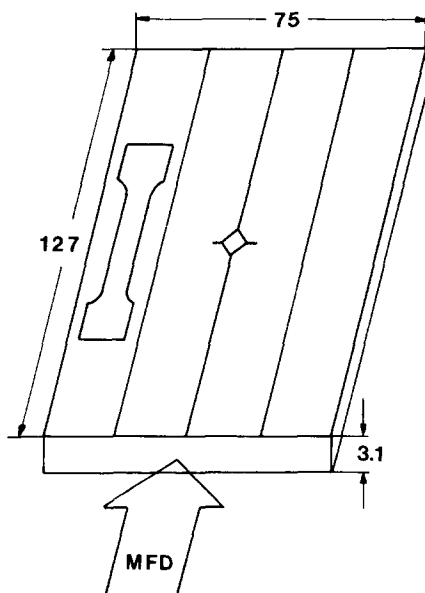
PET plaques, as delivered; position of single edge notched (SEN) and tensile test specimens (MFD is mould fill direction)
